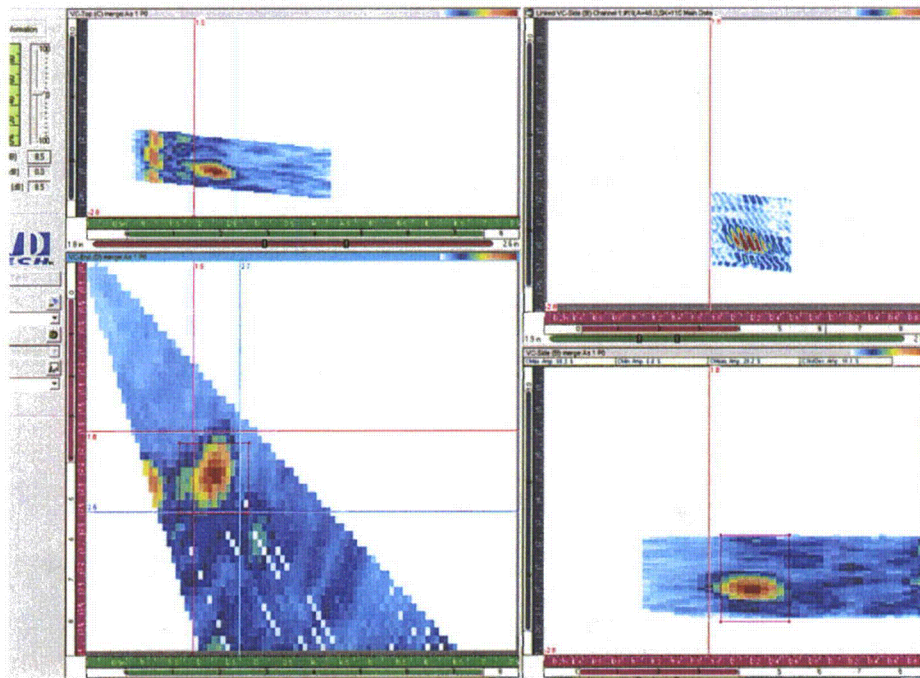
B504 as Inspected from the Equiaxed Side of the Weld with Merged Data, Showing a Yes Detected
